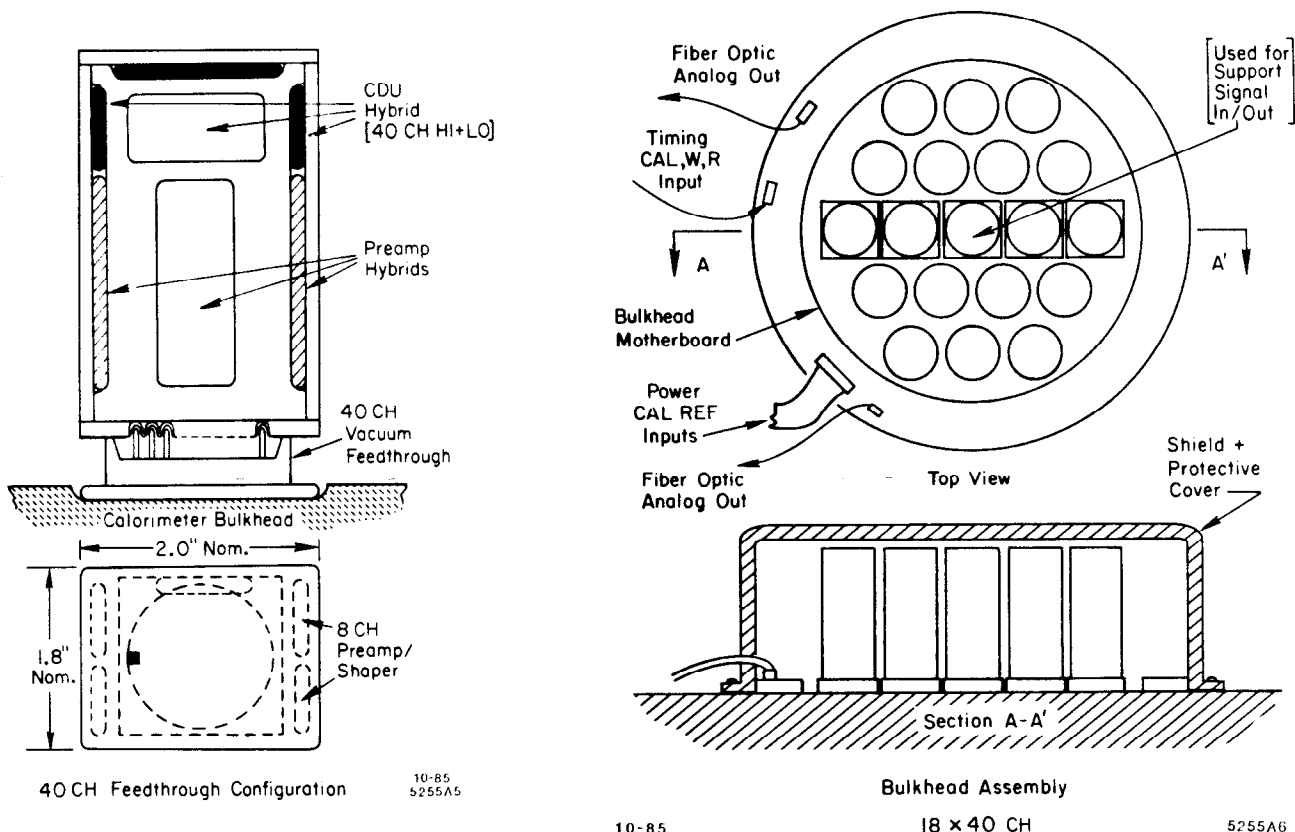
(a) and (b) LAC Proposed Front End Packaging; Bulkhead Assembly.
